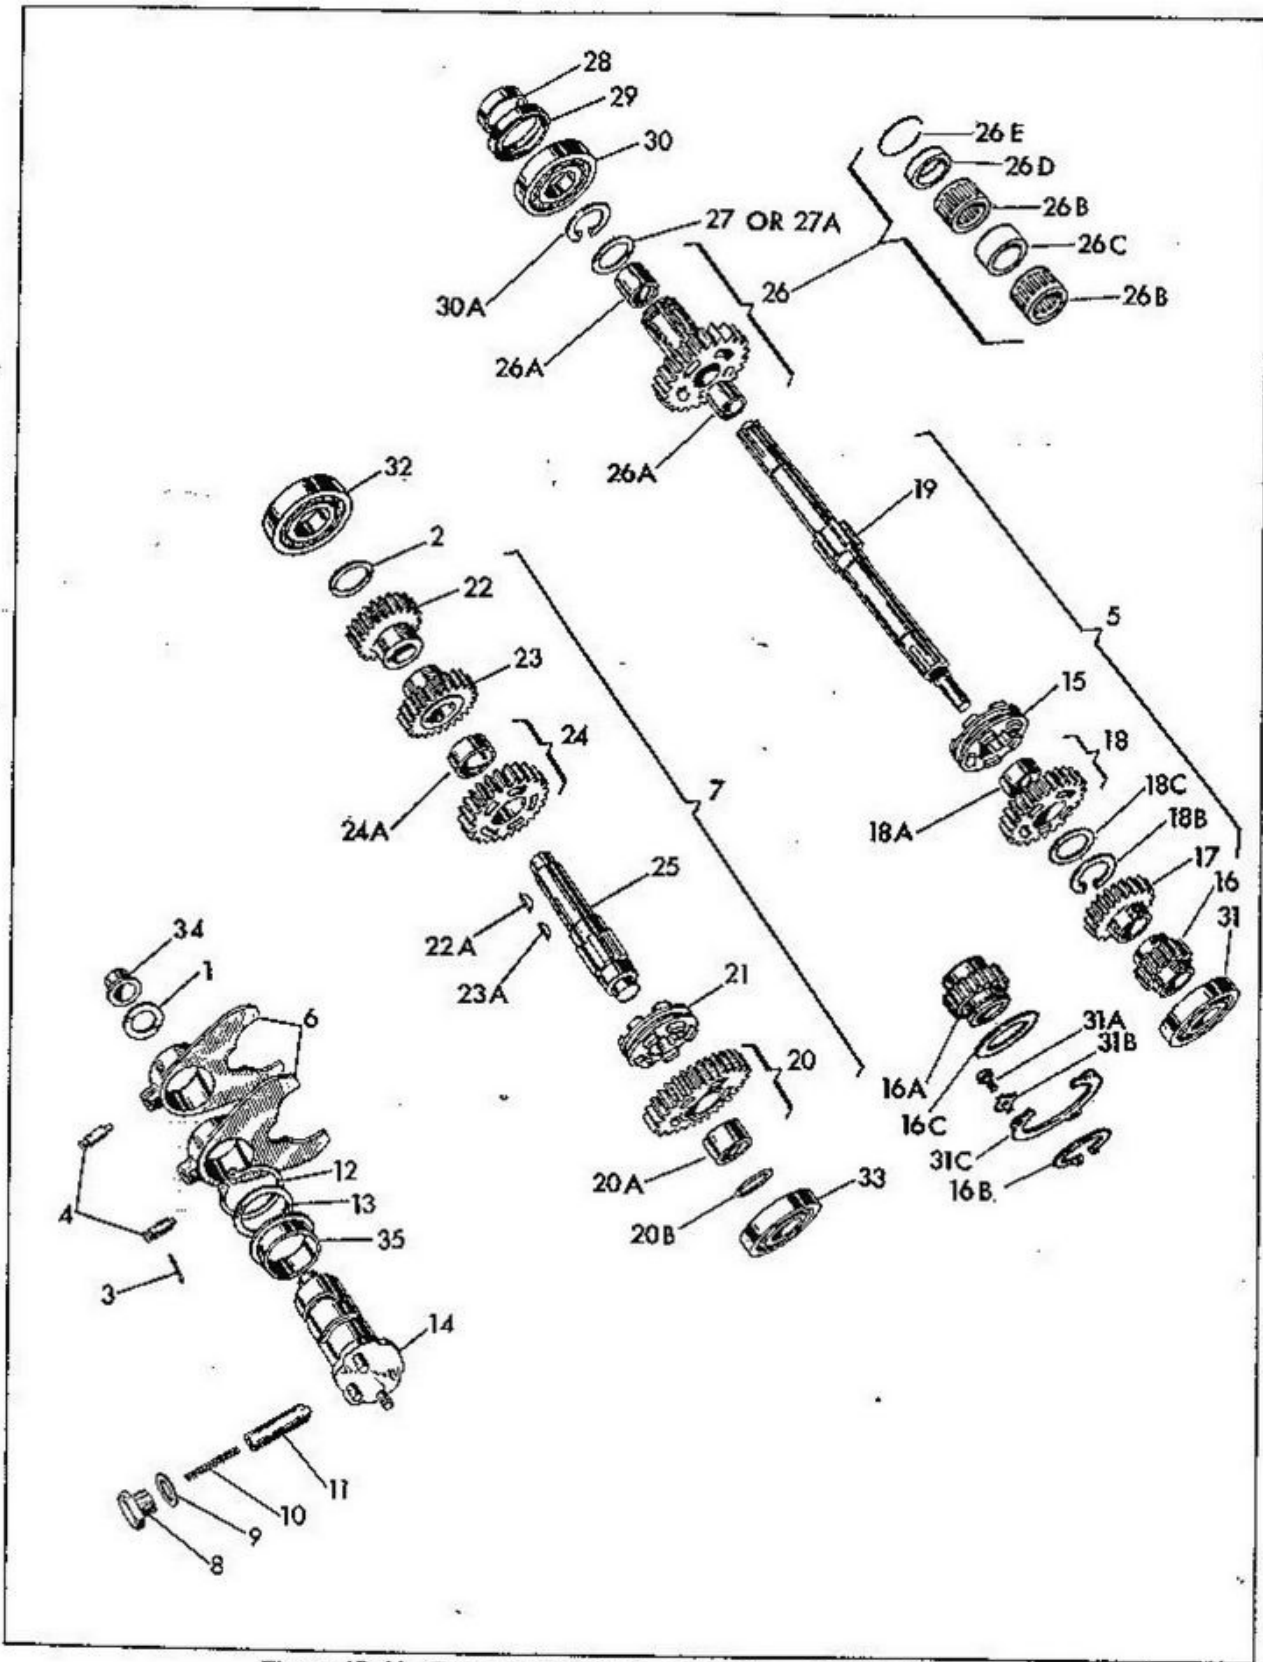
D-32. Transmission, 1972 and Earlier - Exploded View
